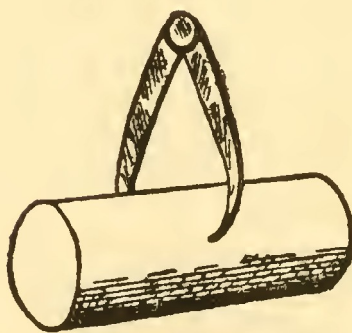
TESTING DIAMETER WITH OUTSIDE CALLIPERS.
